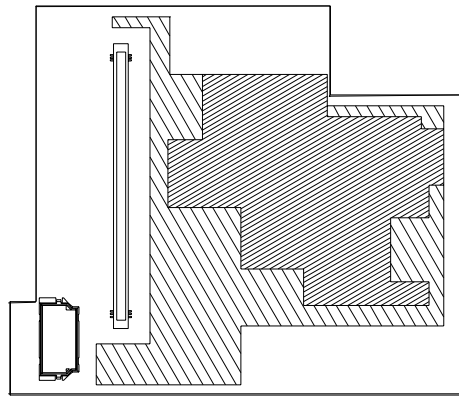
Small Form Factor I/O Expansion Card (SFF EC) – top view – card size, installation label
